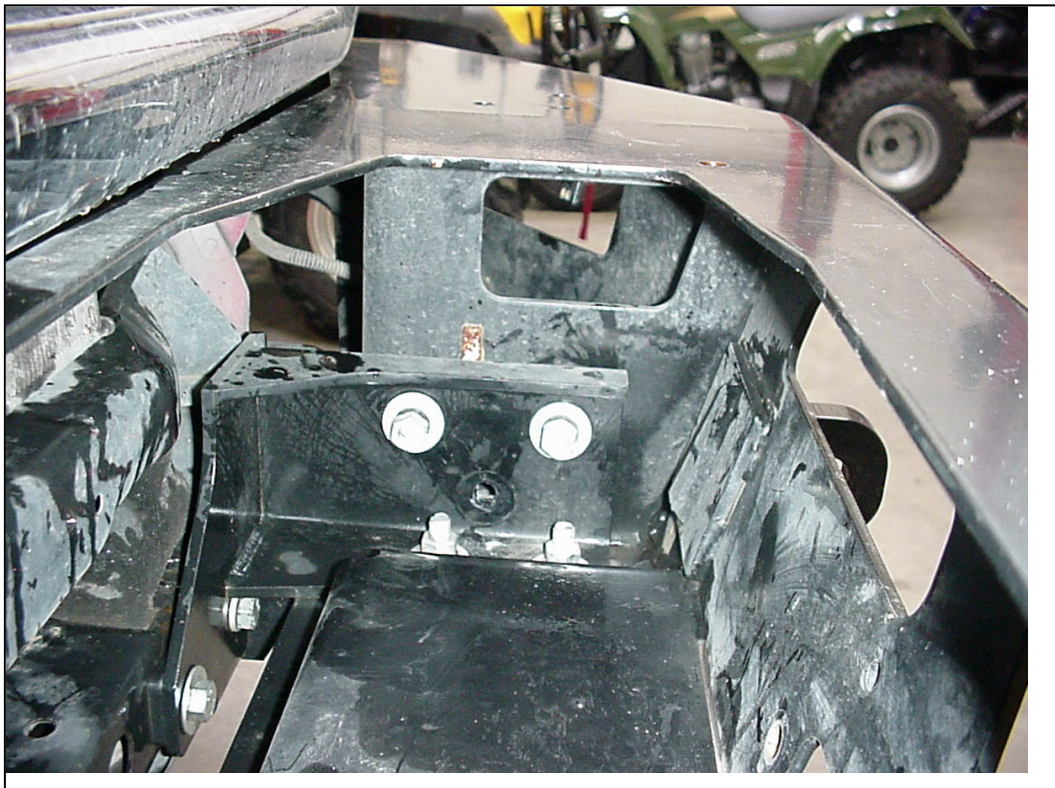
, BUMPER TO FRAME BRACKET BOLTS.
